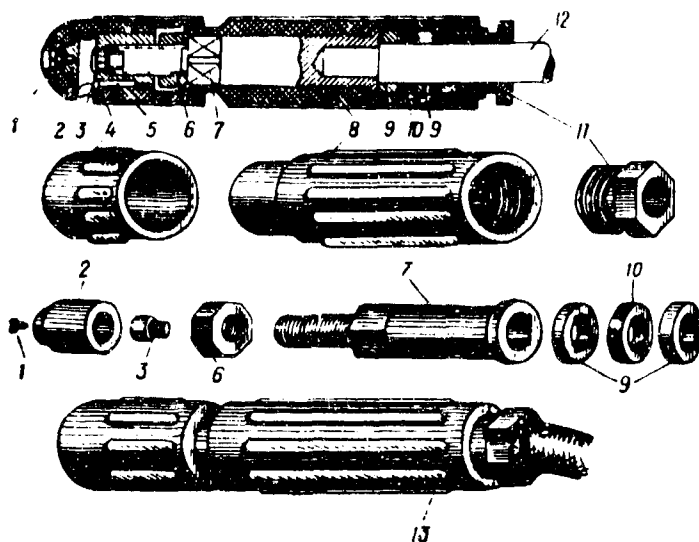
Electrode Holder for Underwater Welding (Holder Is Type EPS-2): 1 - stay screw; 2 - sleeve; 3 - contact nipple; 4 - textolite cap; 5 - key; 6 - pressure nut; 7 - rod with filed square section; 8 - handle; 9 - brass rings; 10 - rubber sealing ring; 11 - stuffing box-type bushing; 12 - welding cable; and 13 - outer view of electrode holder.
